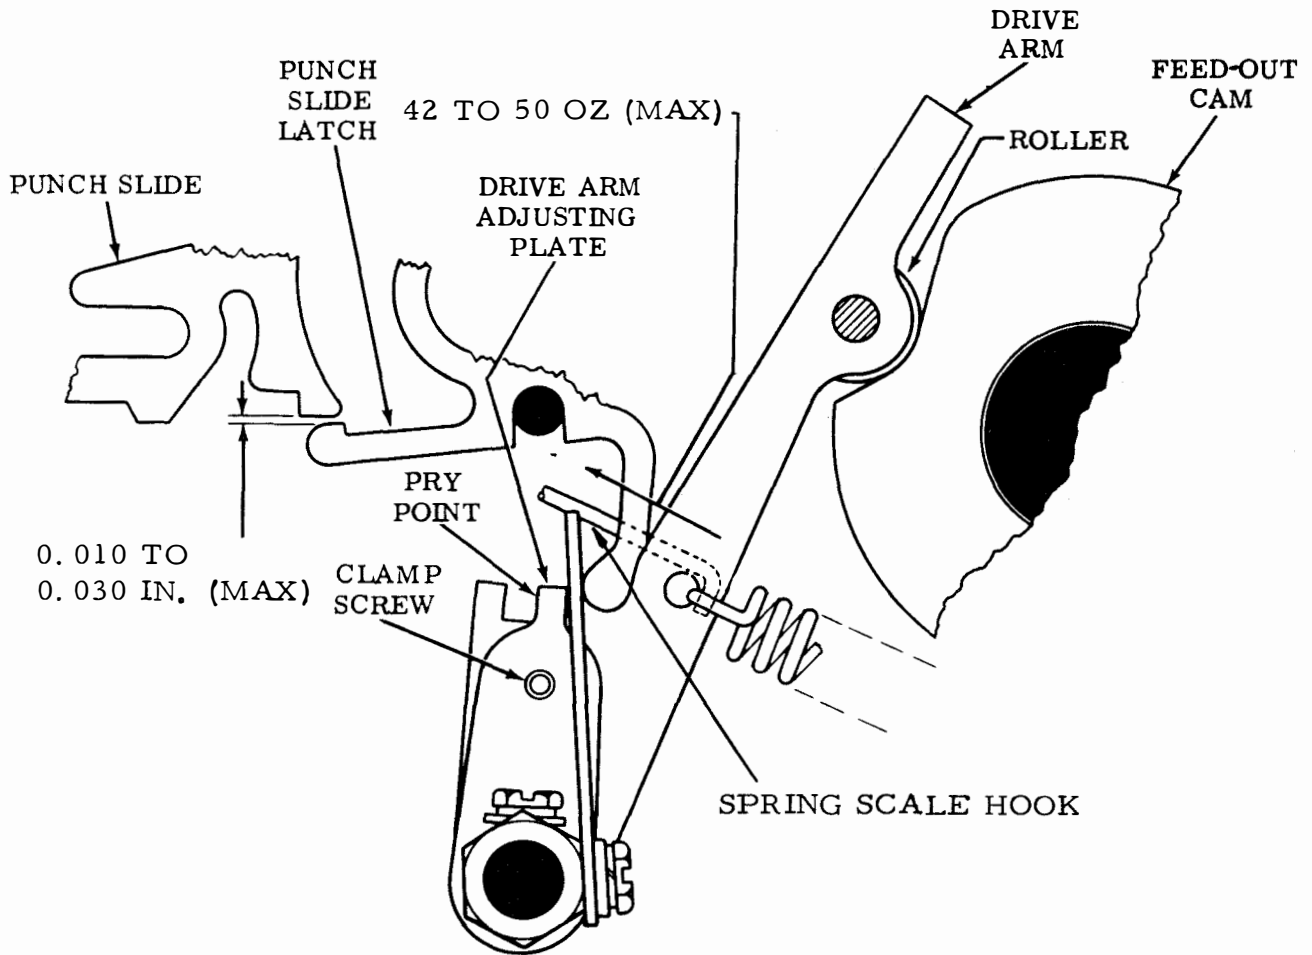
Drive Arm Spring and Punch Slide Latch, Reperforator, Front View
